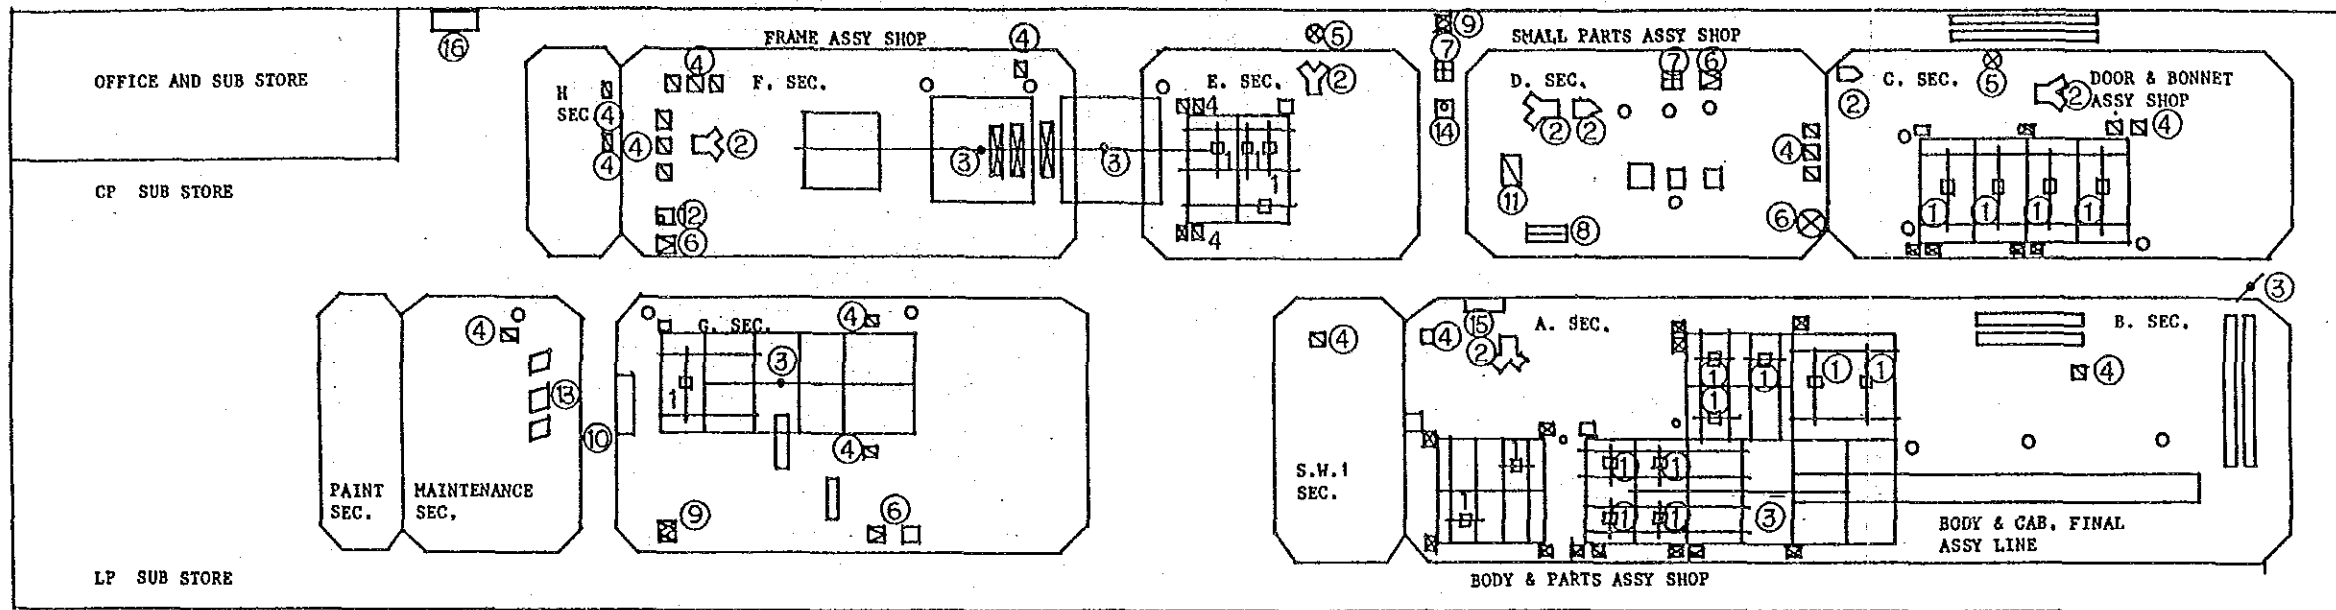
NO.4 HEAVY INDUSTRY BODY ASSEMBLY SHOP EQUIPMENT LAYOUT
